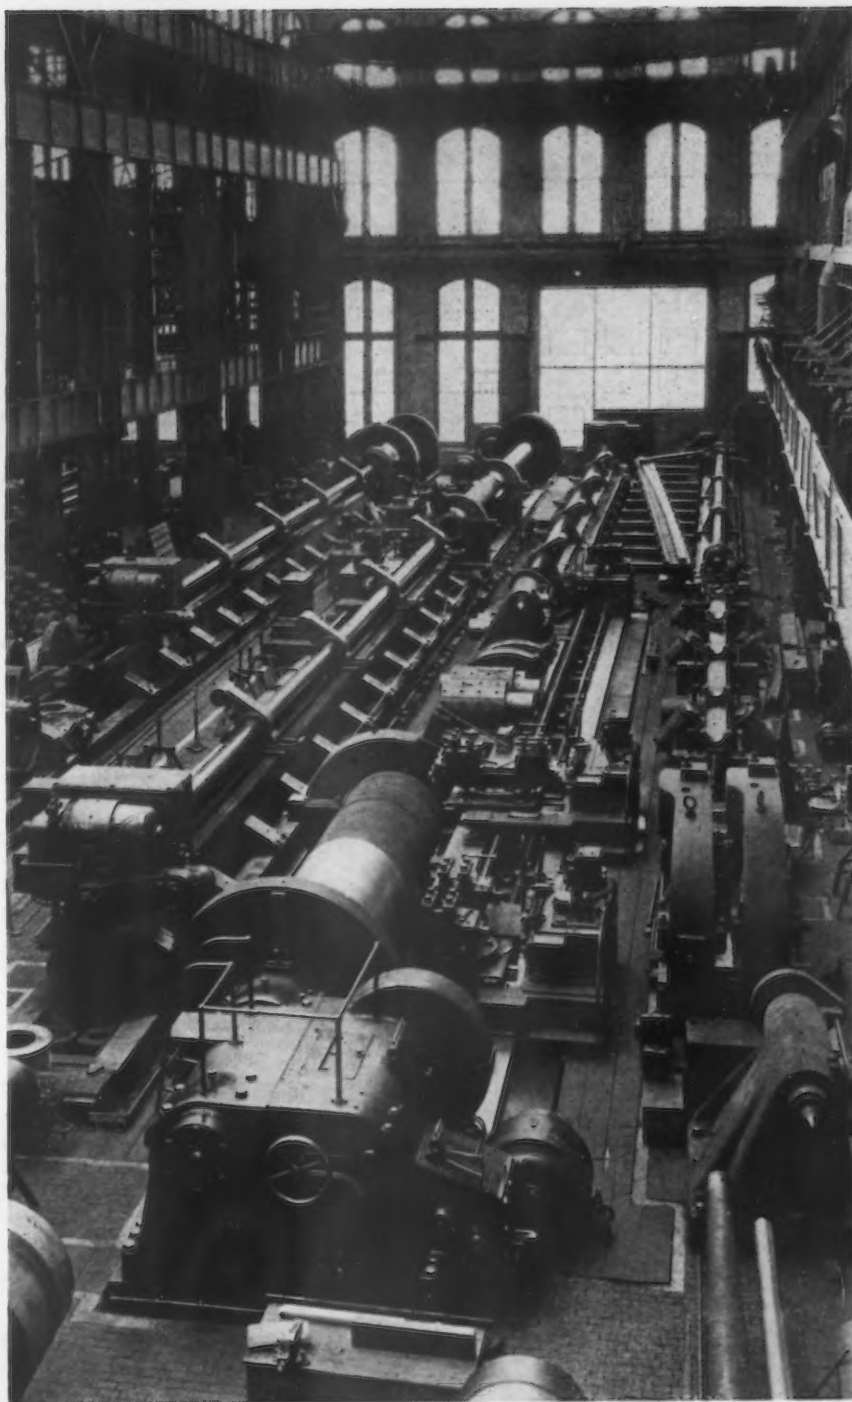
Finish turning and boring operations on guns and their component parts are done on these three 102-in. finishing lathes. This view also shows the rifling machine.
